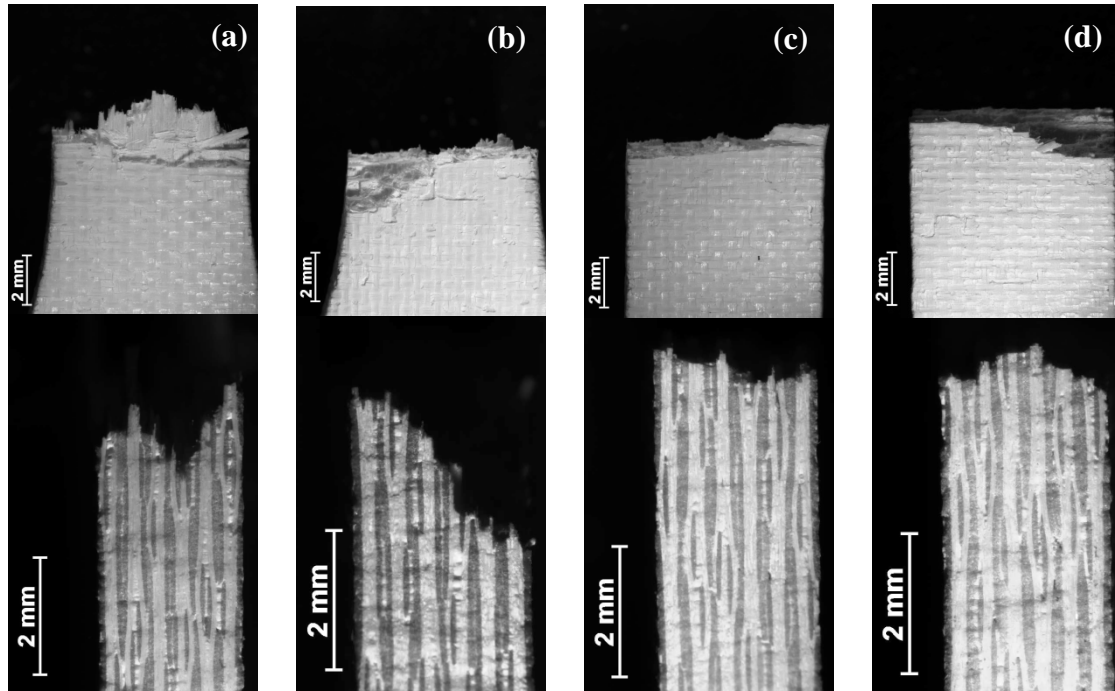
Fracture surfaces obtained in tensile tests of the N720/AS specimens heat treated at 1200°C for: (a) 10 h, (b) 20 h, (c) 40 h, and (d) 100 h
